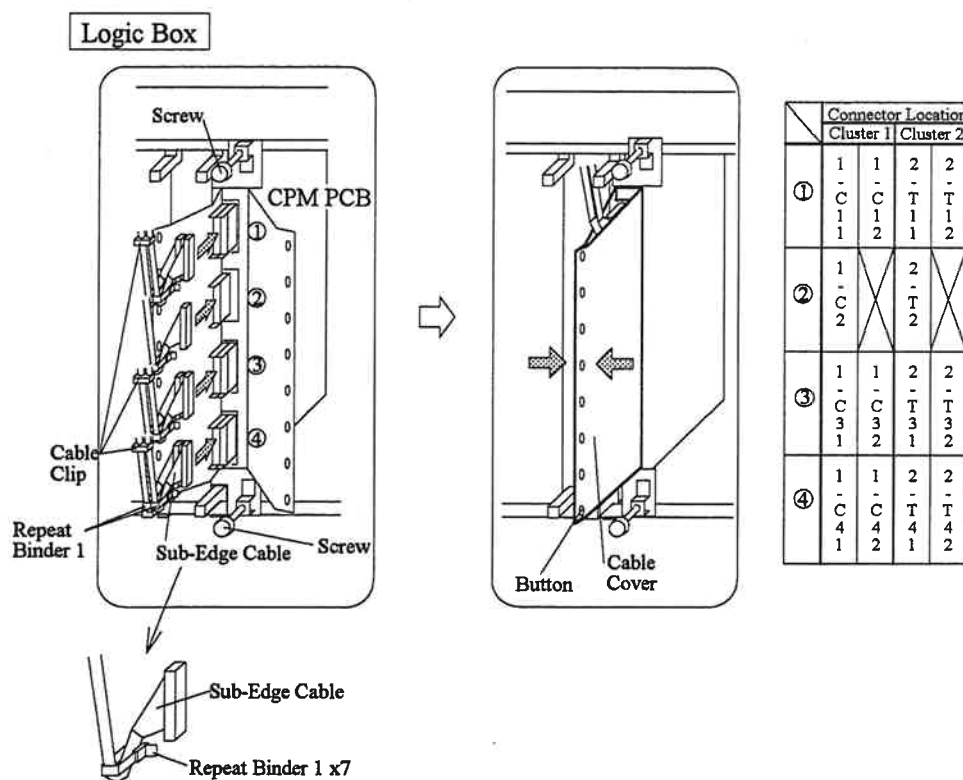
Insertion of the CPM PCB
